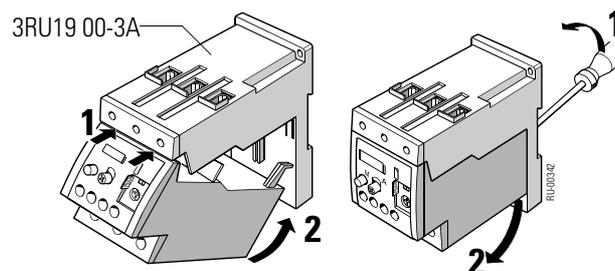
Mounting and removal of the adapter for individual installation (S2)
